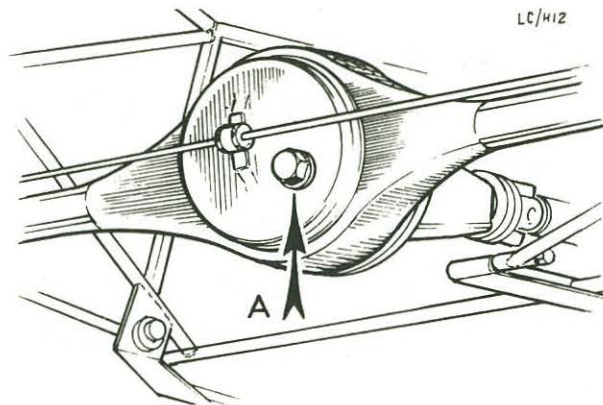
A - REAR AXLE OIL FILLER/LEVEL PLUG
